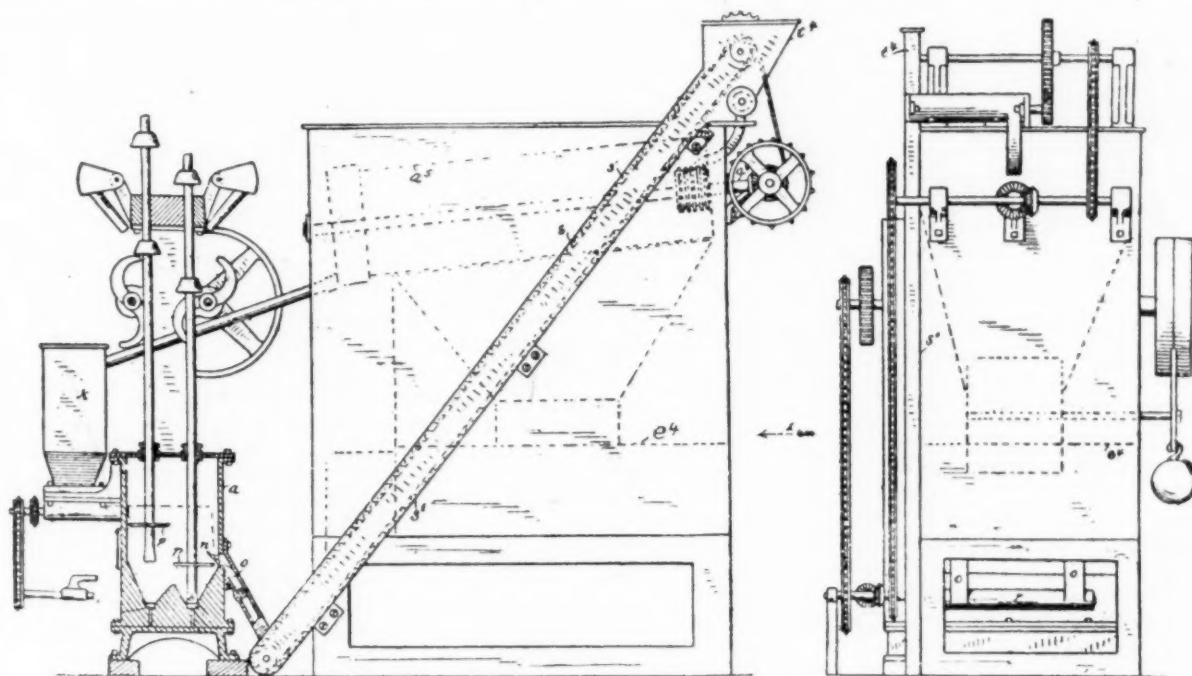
INTERIOR AND WORKING PARTS OF AUTOMATIC STAMPING AND SIFTING MACHINE.
